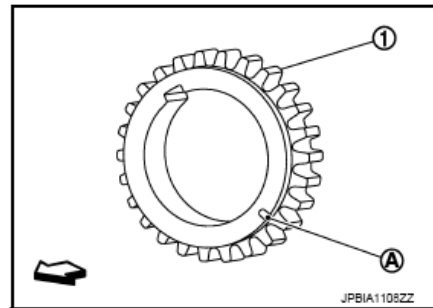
Identifying Crankshaft Sprocket And Matching Mark
